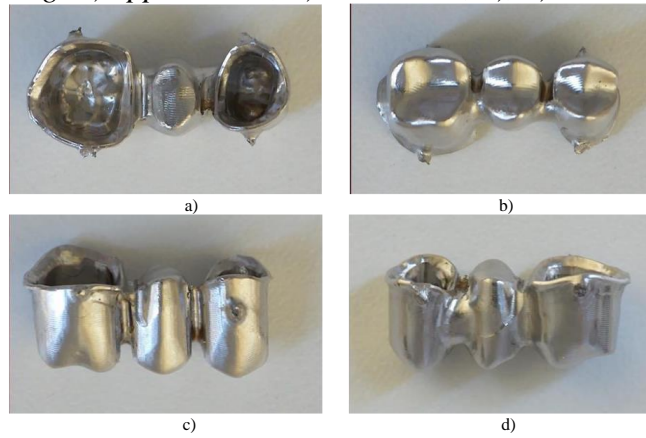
Macroscopic image of the experimental sample obtained by milling: a) upper vision; b) lower view; c), d) side view
